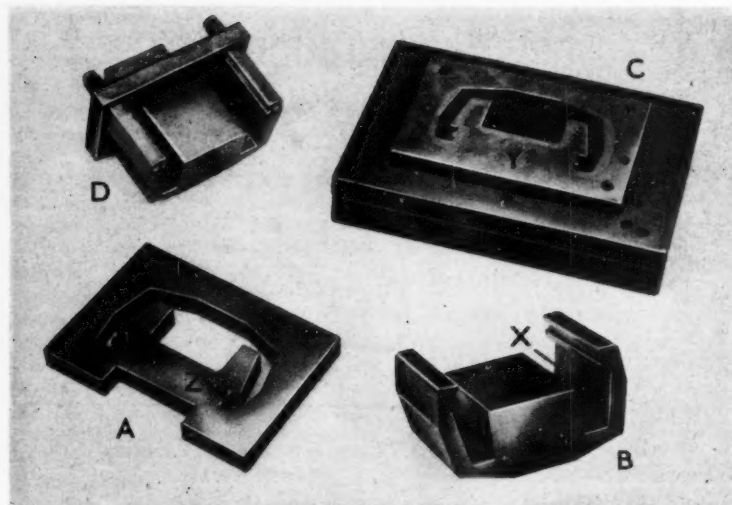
The Partly-finished Tungsten Carbide Die Section is Shown at A, the Press Tool Punch at B, the Kirksite Die for Making Brass Laminations at C, and an Assembled Laminated Electrode at D
